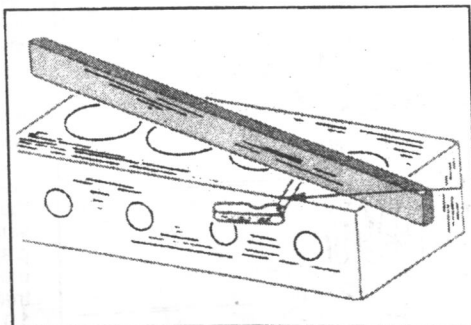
Checking a cylinder head gasket face for distortion. Check in diagonal and longitudinal direction and across the gasket face.
